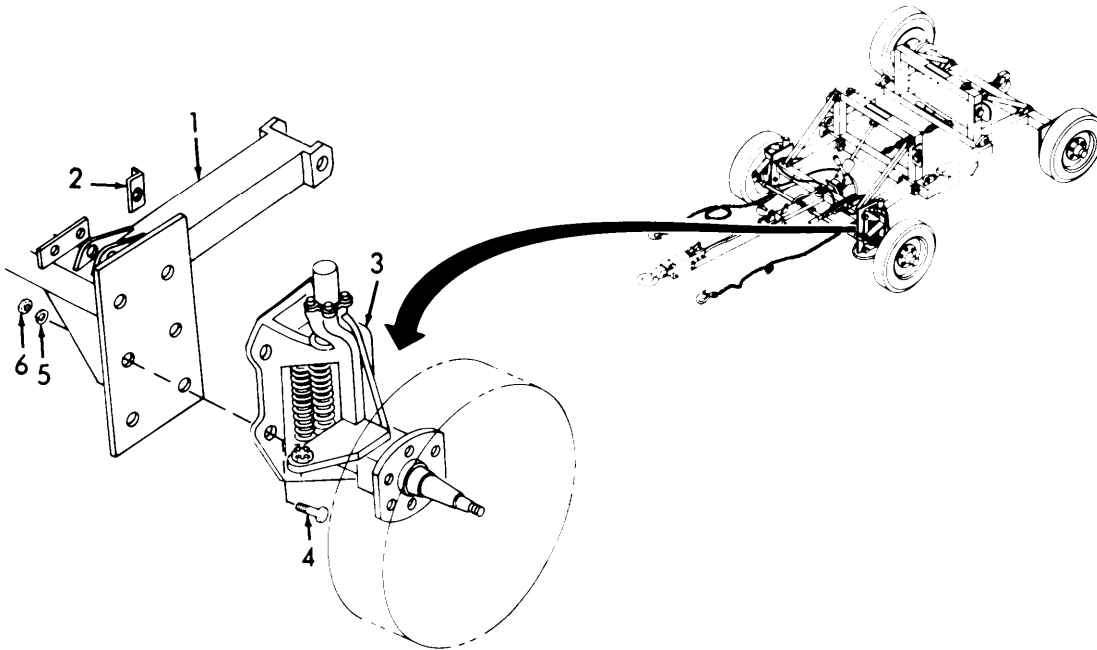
Shock Absorbing Spring Assembly, Installation.
